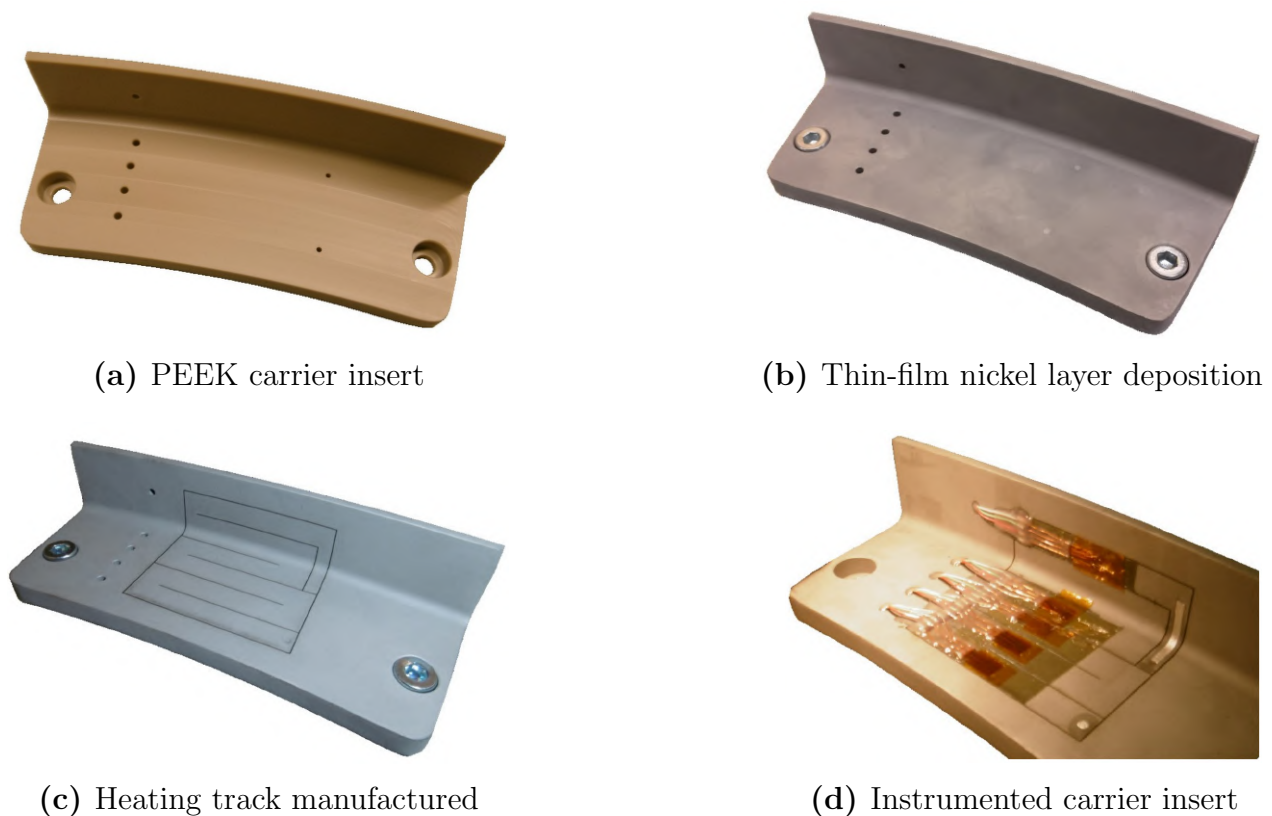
Hub cavity heat transfer setup, rotor-sided carrier insert: exemplary manufacturing and instrumentation steps
